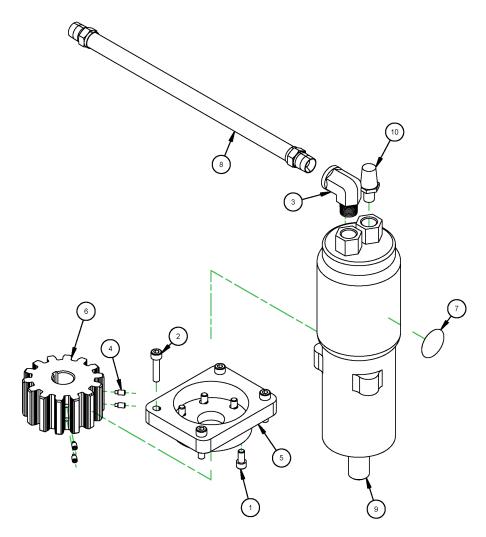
AIR MOTOR DRIVE ASSEMBLY (P/N 58186)
